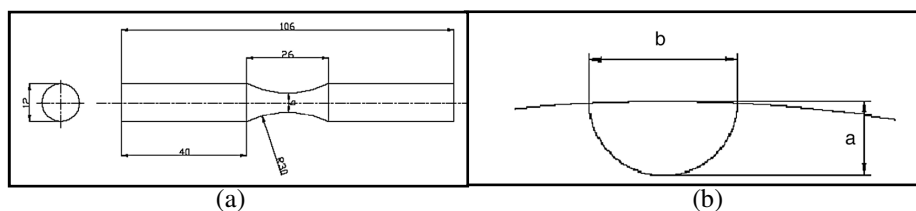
Specimen used for rotating bending fatigue tests: a) Specimen geometry b) particular of the micro-hole
